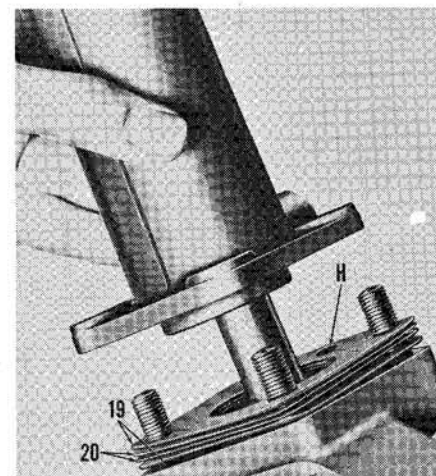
Shims are used between steering column and gear housing to adjust worm-shaft bearings. A gasket (19) should be placed each side of shim stack (20). Be sure oil holes (H) in shims and gaskets are aligned with oil holes in housings.
